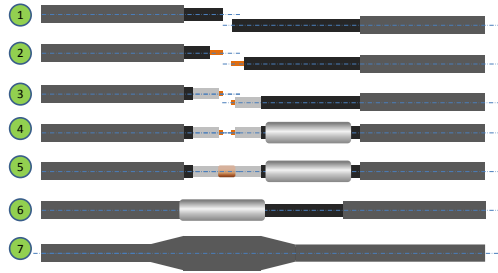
Example of assembly process of a slip-on joint for XLPE HV cables [4].
